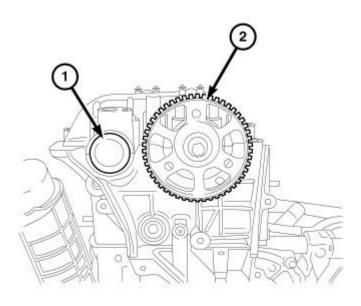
Locking Tool, Camshaft Sprocket & Bolt Courtesy of CHRYSLER LLC
